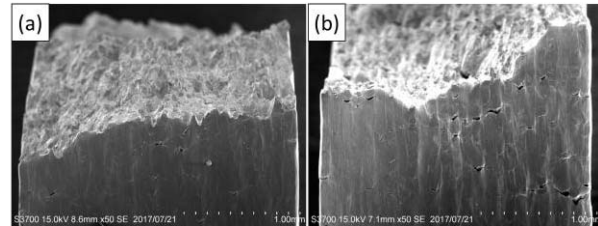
Fracture surfaces of as-built 0deg. specimens of (a) 67/67 block, (b)90/90 block after tensile test at 650°C (side).
